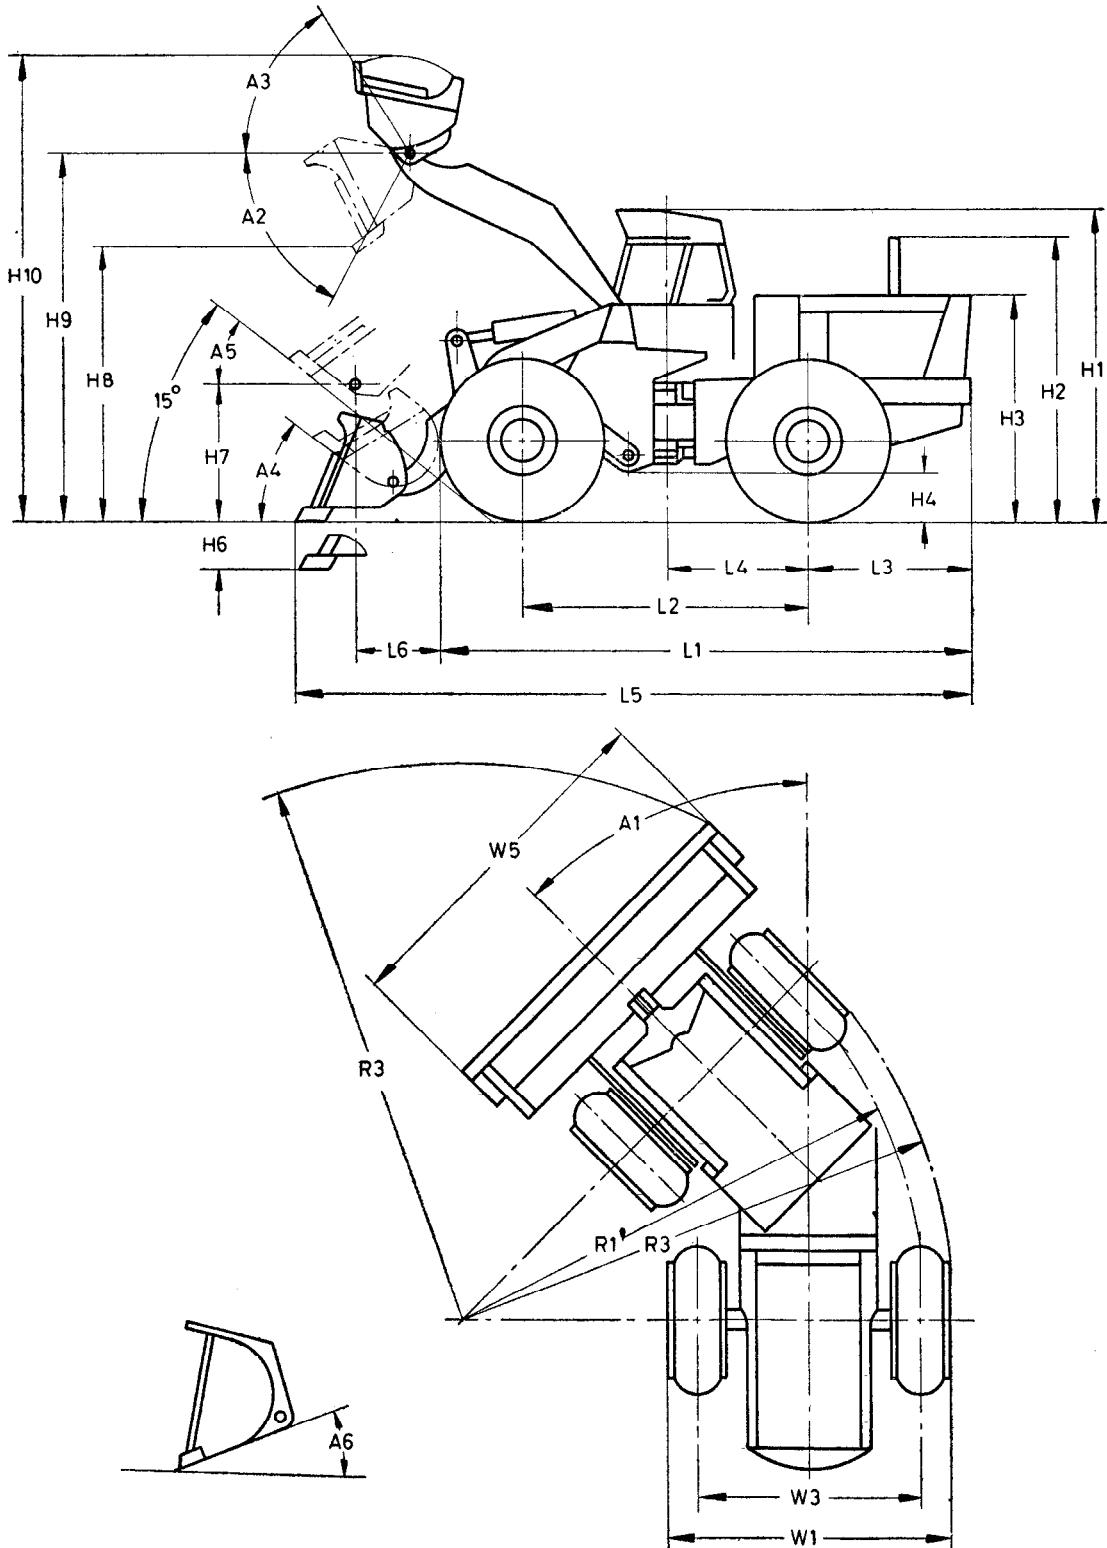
DIMENSIONS OF BASE MACHINE ( WHEEL LOADER )
